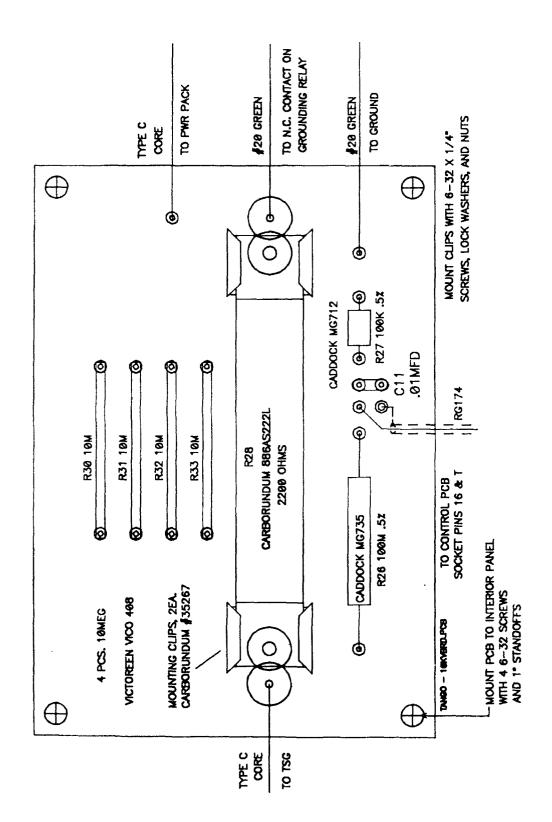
, 10-kV RESISTOR BOARD COMPONENT LAYOUT
